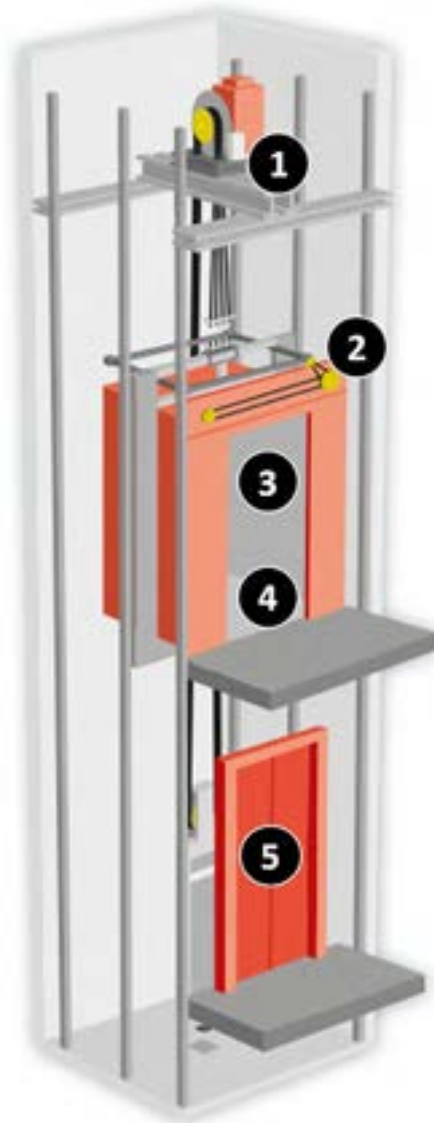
Common engineering adhesive manufacturing applications for elevators: (1) threadlocking of motor fasteners; (2) threadlocking of door automation; (3) bonding of stiffeners to car side panels; (4) bonding of car floor; (5) bonding of stiffeners to landing doors.
